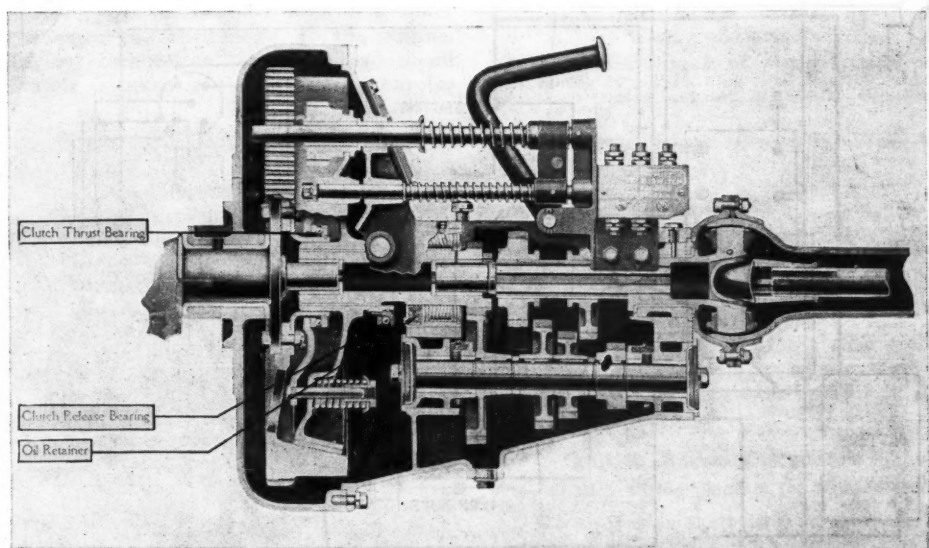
Clutch and transmission on 1916 Maxwell, showing oil-retaining washer which separates the clutch housing from that of the transmission
